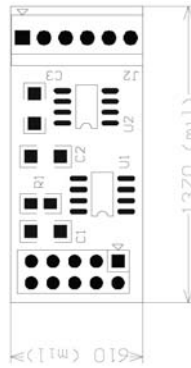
SSCBQE-ADDON Board Mounting Hole Outline
